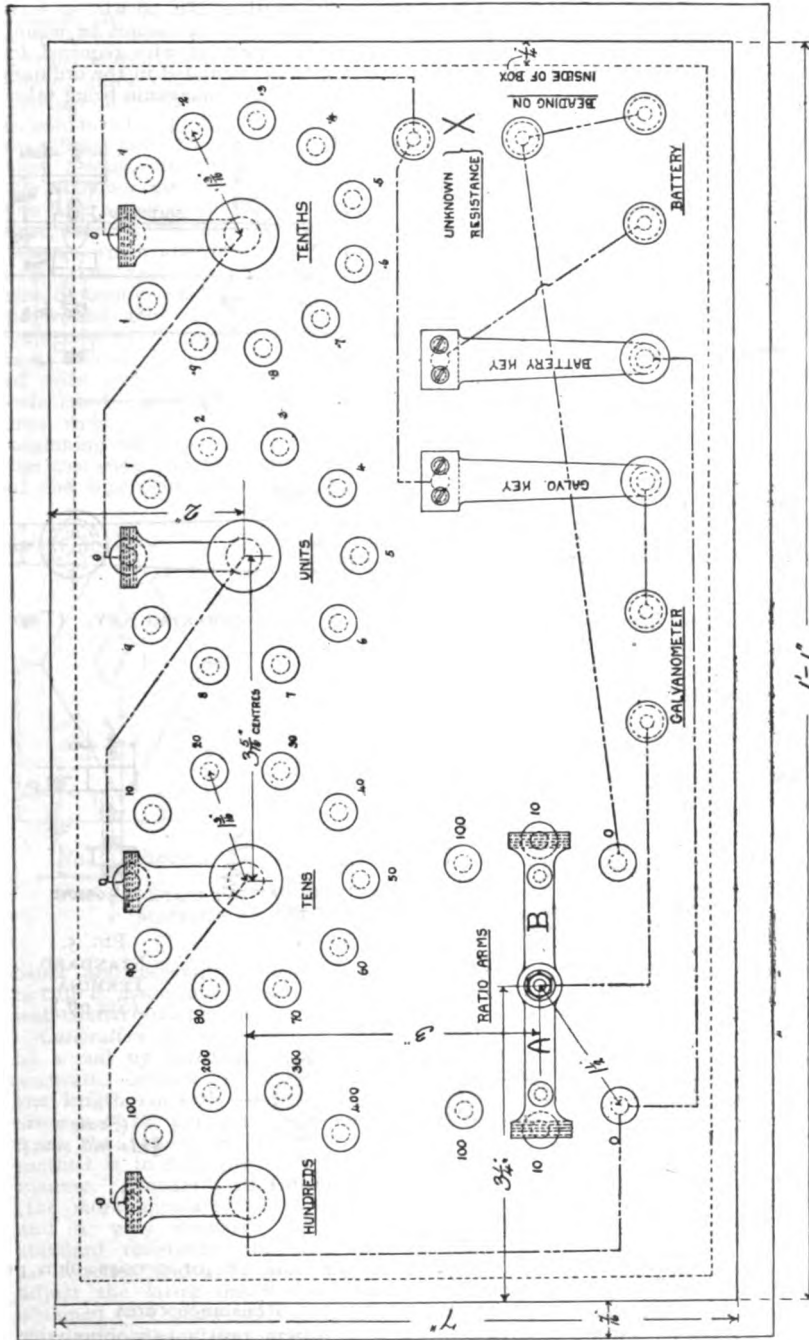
PLAN OF BOX SHOWING DIAL BOARD. (Half full size.)
